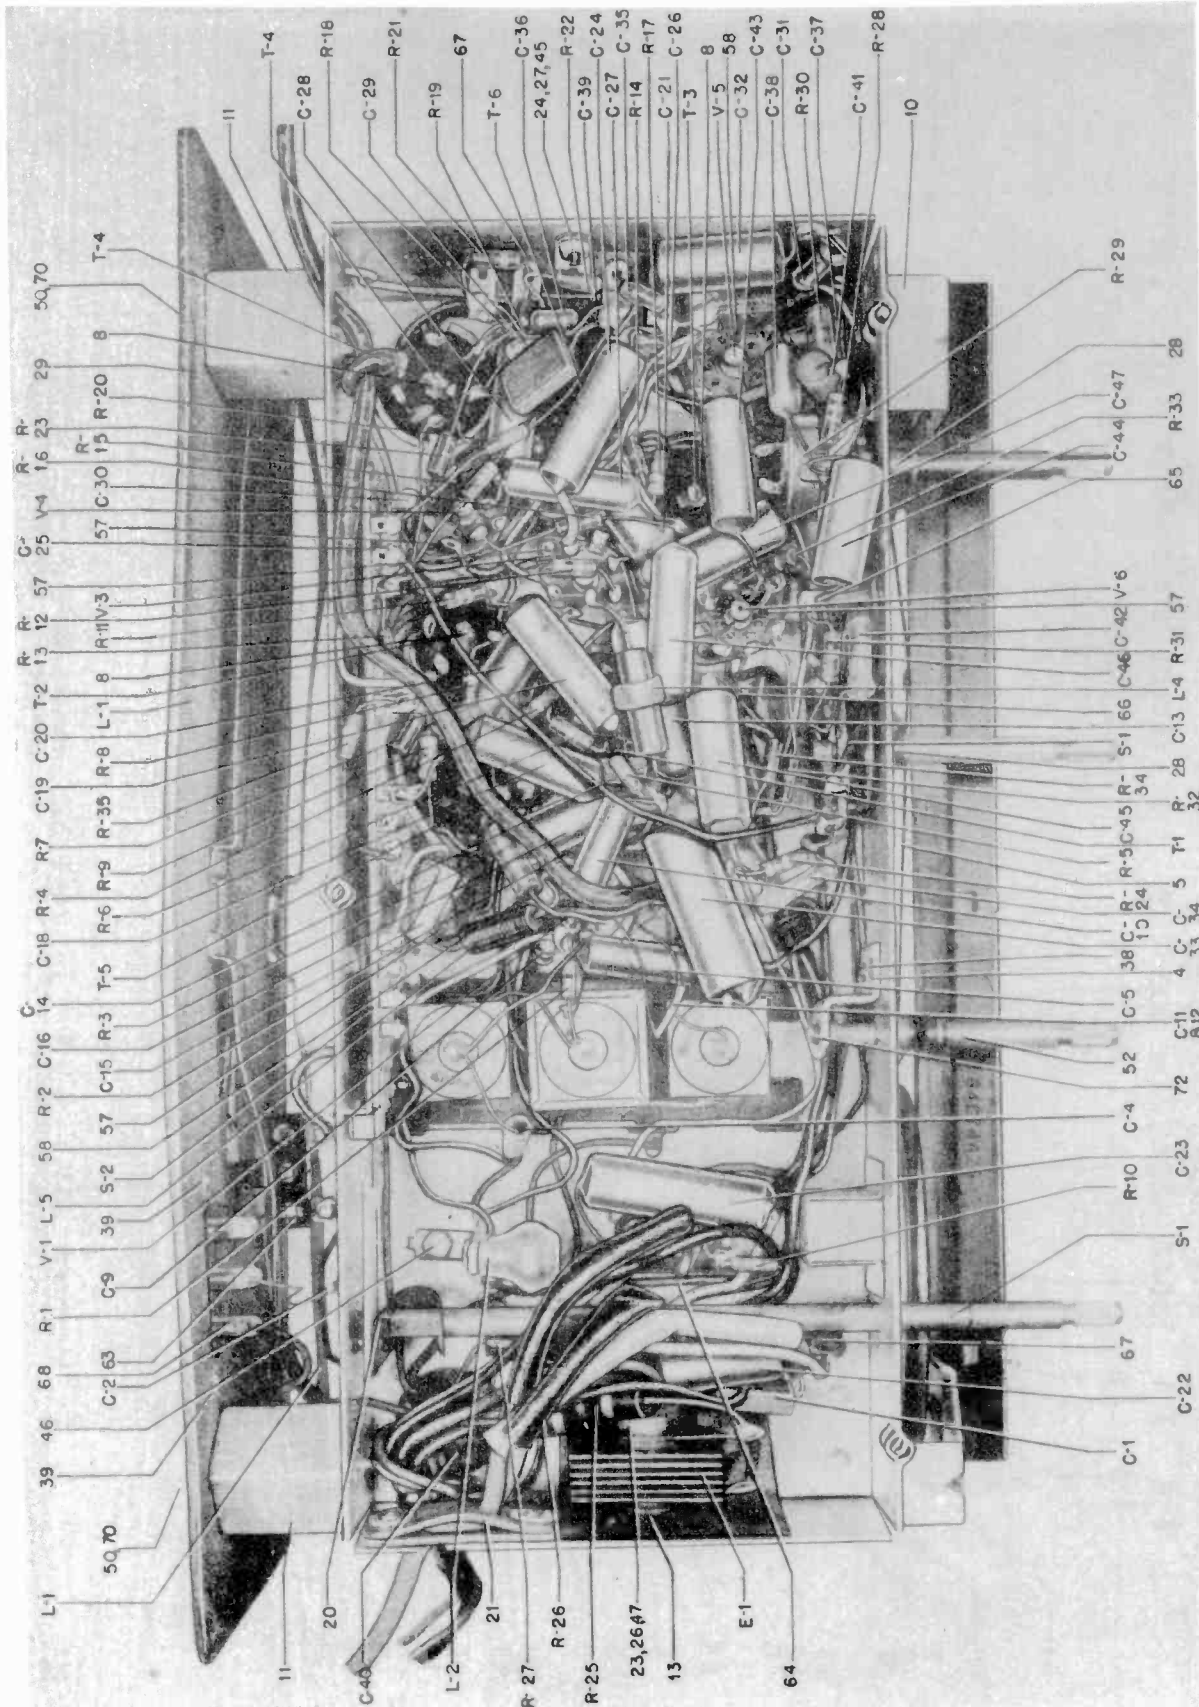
CHASSIS HS-128 & HS-132 CHASSIS PARTS LOCATION - BOTTOM VIEW
